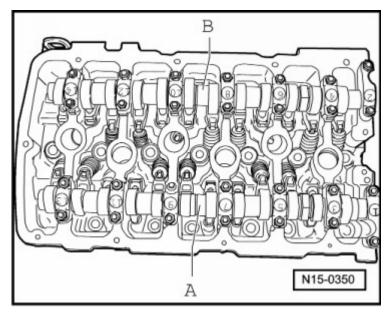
Identifying Intake Camshaft And Exhaust Camshaft Courtesy of AUDI OF AMERICA, LLC
